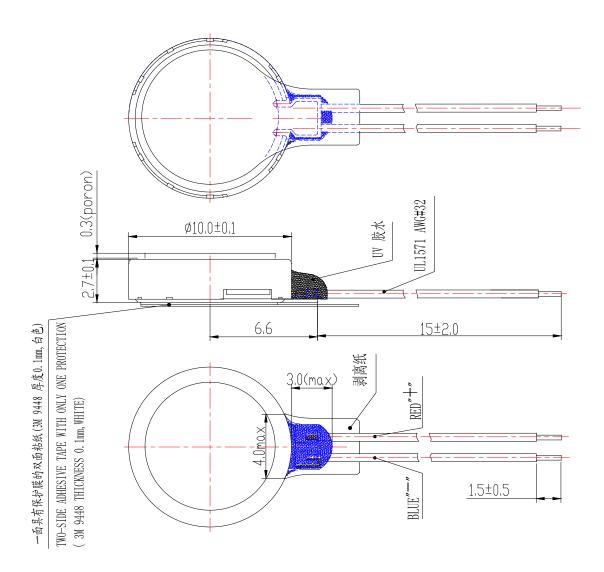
Motor Housing Configuration 图 1 电机外形结构图
